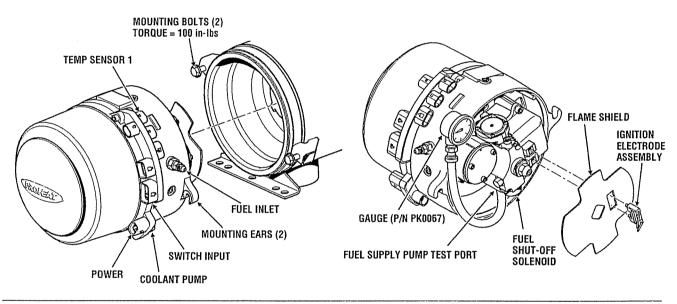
Burner Head Removal and Fuel Pressure Test
